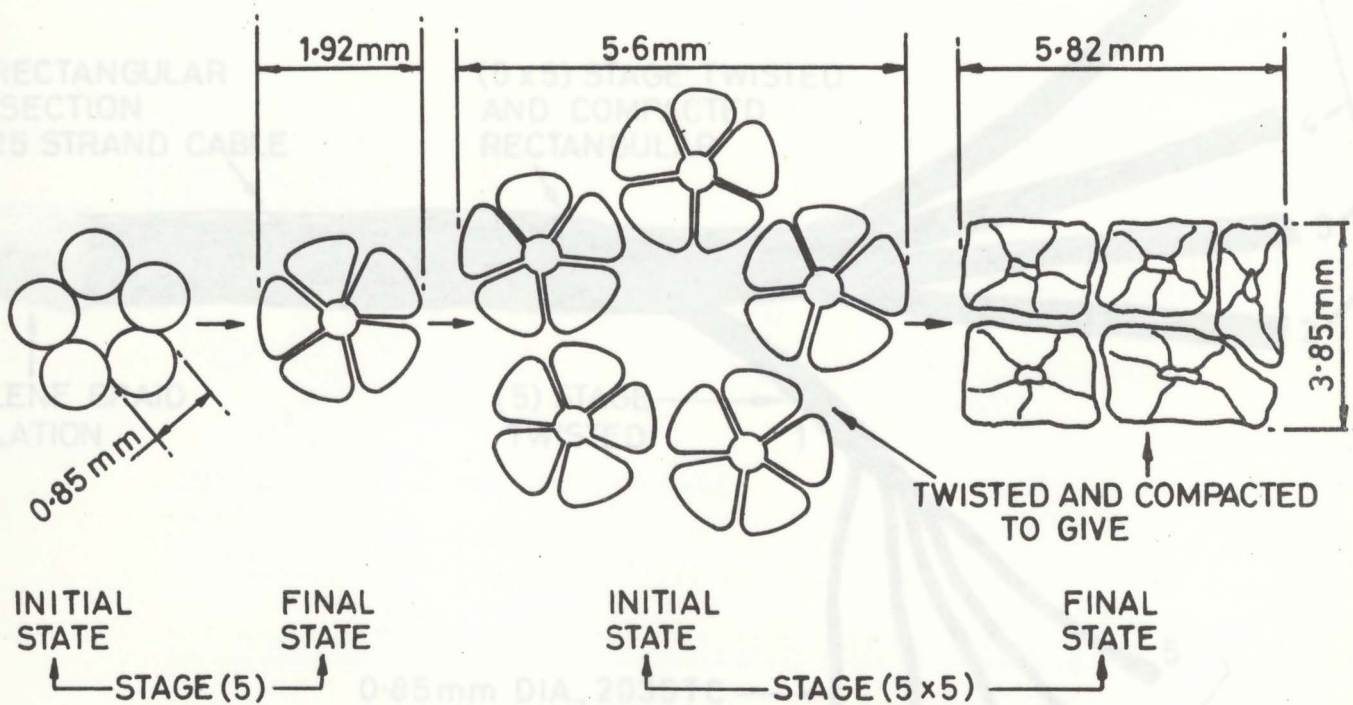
AC IV, 25 STRAND - RECTANGULAR SECTION CABLE
